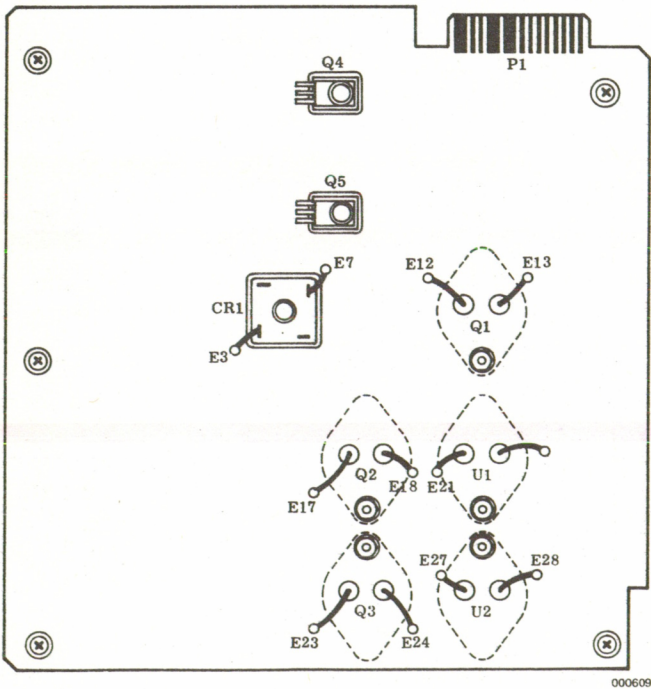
A1 Regulator PWA - With Components Involved with Removal/Replacement of PWA Outlined
